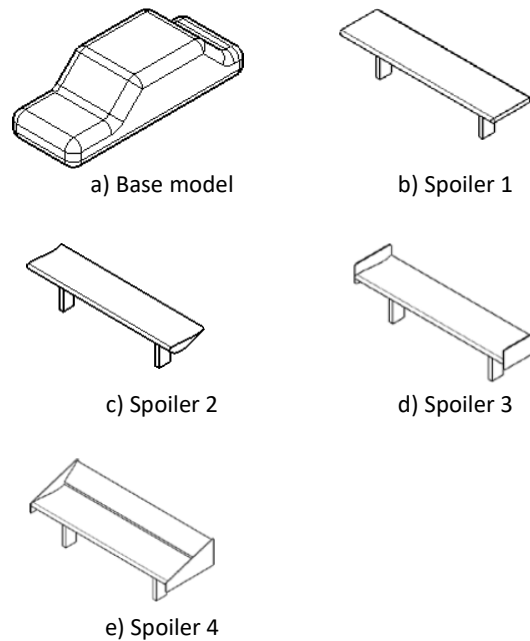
(a) 3-dimension generic passenger vehicle model (b) spoiler model 1 (c) spoiler model 2 (d) spoiler model 3 (e) spoiler model 4
